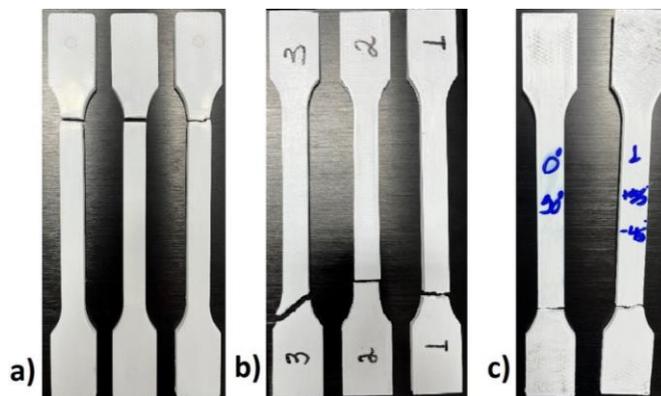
a) Injected tensile samples after the test; b) 3D printed samples after the test (printed orientations: 1 = 0°, 2 = 90°, 3 = 45°); c) 3D printed samples after the test (0°/90°, 45°/-45°).
